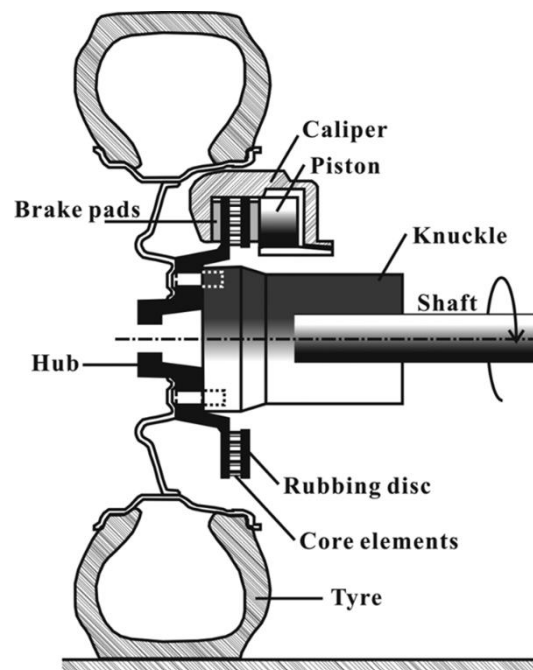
Brake system showing the floating brake caliper, the brake pads, and disc [11]
